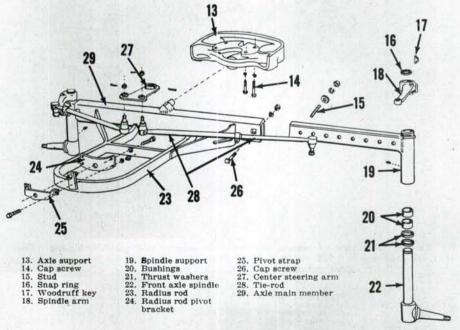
Exploded view of typical adjustable axle and associated parts. Radius rod (23) is welded to axle main member (29).
